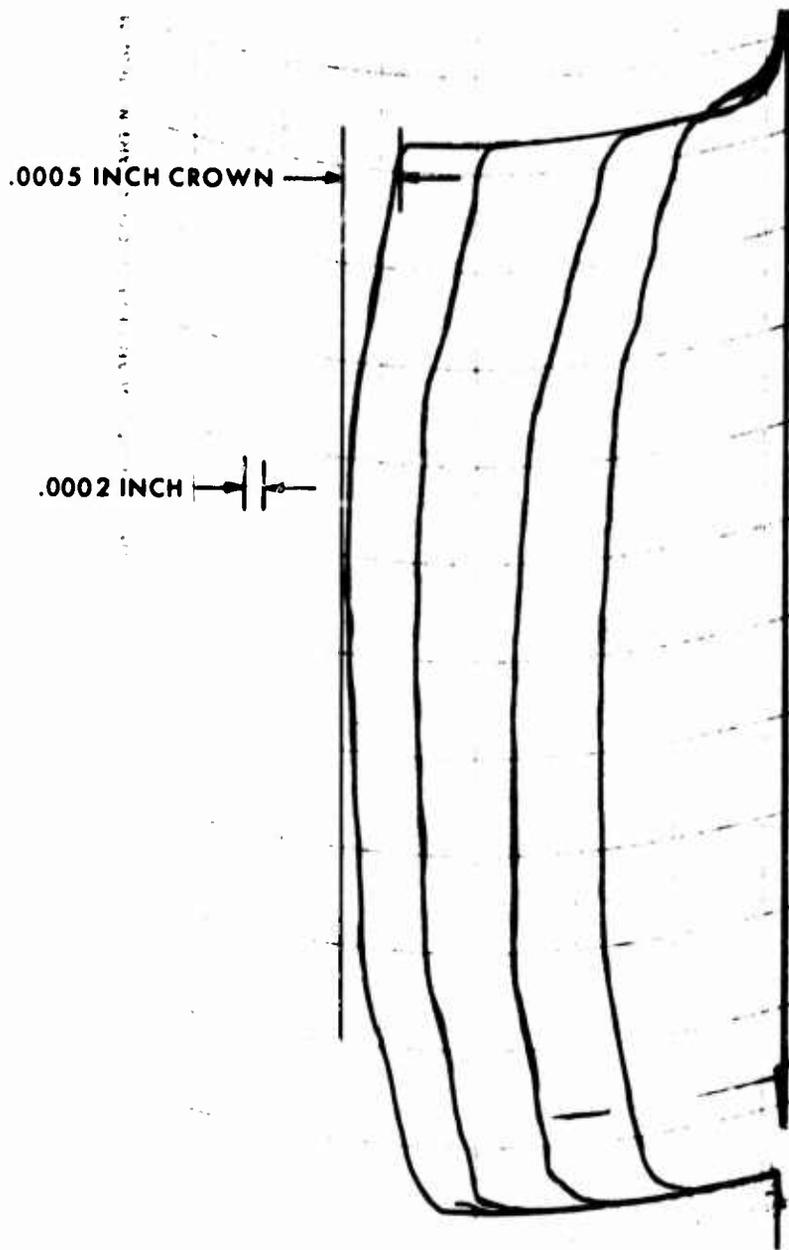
Crown Inspection Chart for Second-Row Pinion Large Diameter Gear.
